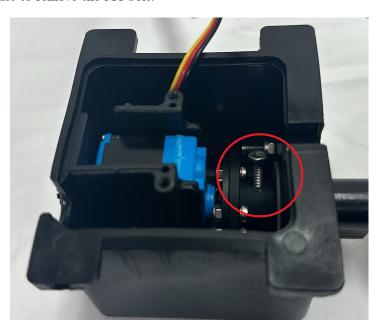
Thruster Shaft (Skid Does Not Have Servo)
